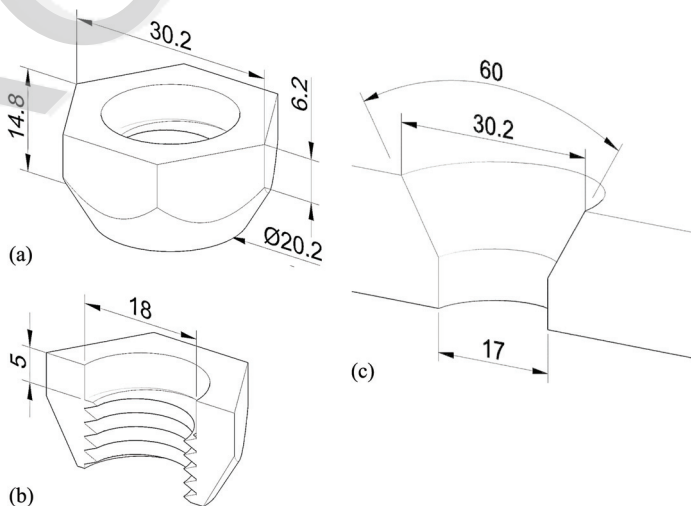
Geometry of the locking connection: (a) full nut; (b) half nut; (c) half countersunk hole
